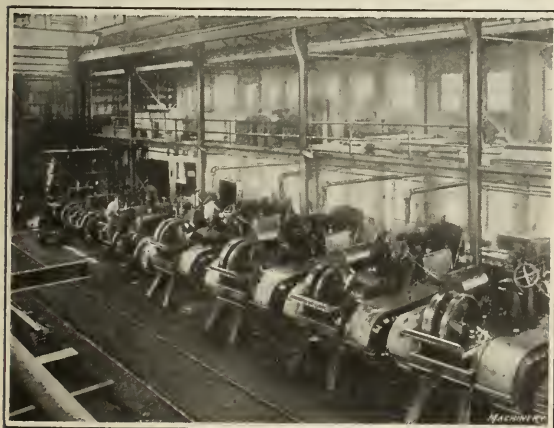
Holt Caterpillar Tractors undergoing Shop Test on Blocks
